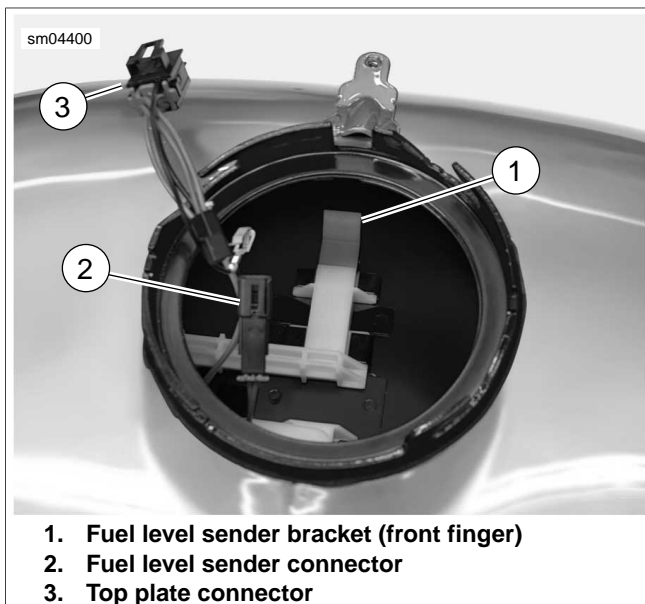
Front Finger (Fuel Level Sender Bracket)
